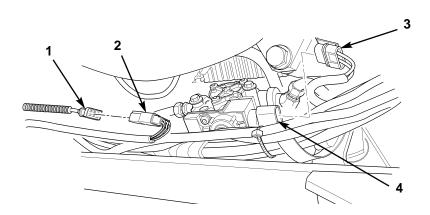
Connecting Front Wheel Sensor and Modulator Harnesses.
